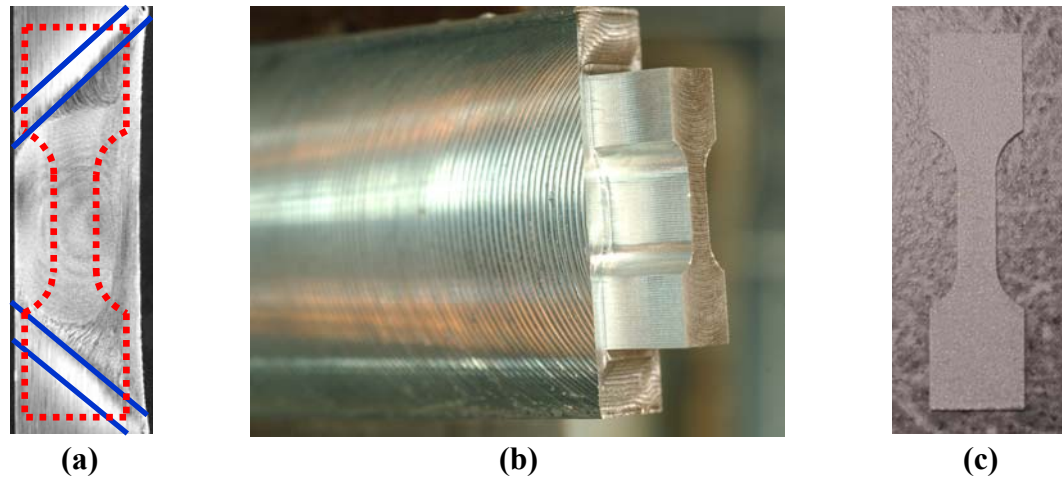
Miniature tensile specimens fabricated from the FSW nuggets. Shown are the specimens from the FSW transverse microstructure with the specimen geometry superimposed (a). An end mill was used to machine the dogbone geometry (b) which was then sliced into individual specimens (c) using wire EDM.
